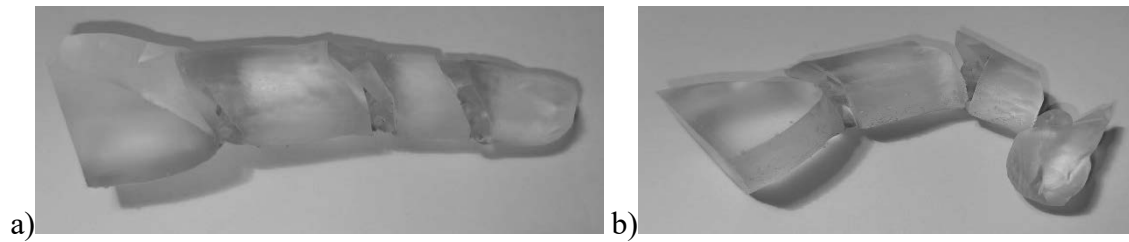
Assembled finger elements: a) with moving parts; b) with bent moving parts.
